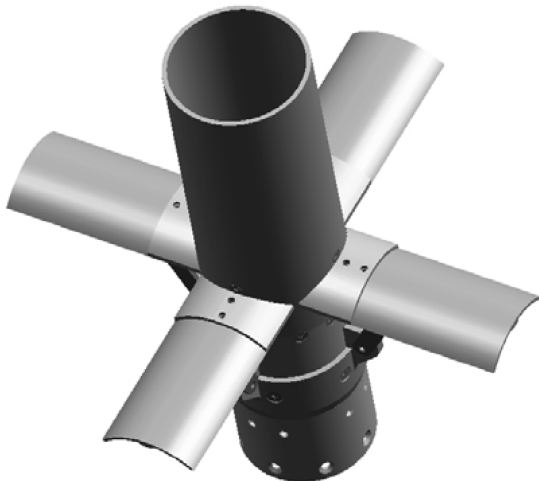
ARGUS aftbody with blocker plates installed below drag brakes.
